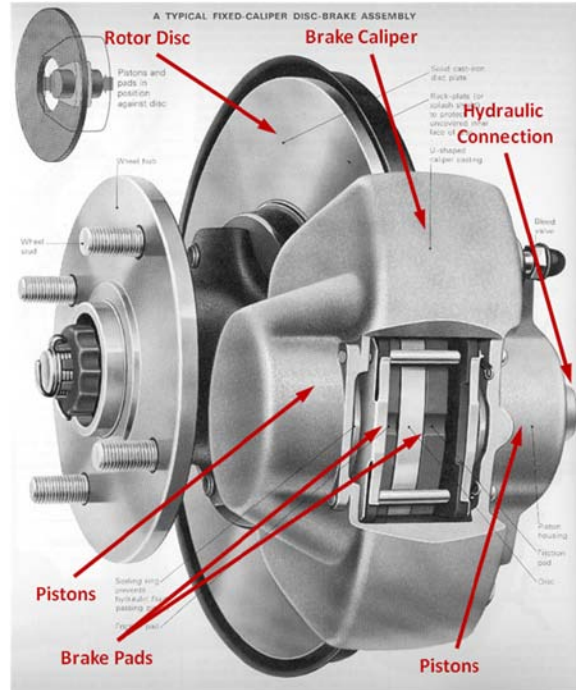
Typical Fixed Disc-Caliper Brake Assembly [8]
